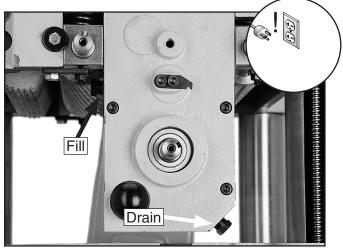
Gearbox oil drain/fill locations (sprockets and chains removed for clarity).
